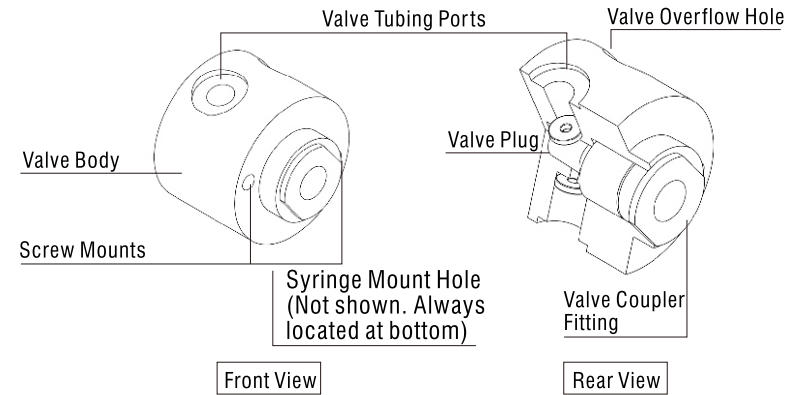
MSP1-D1 Valve Installation (3-Port Valve Shown)
